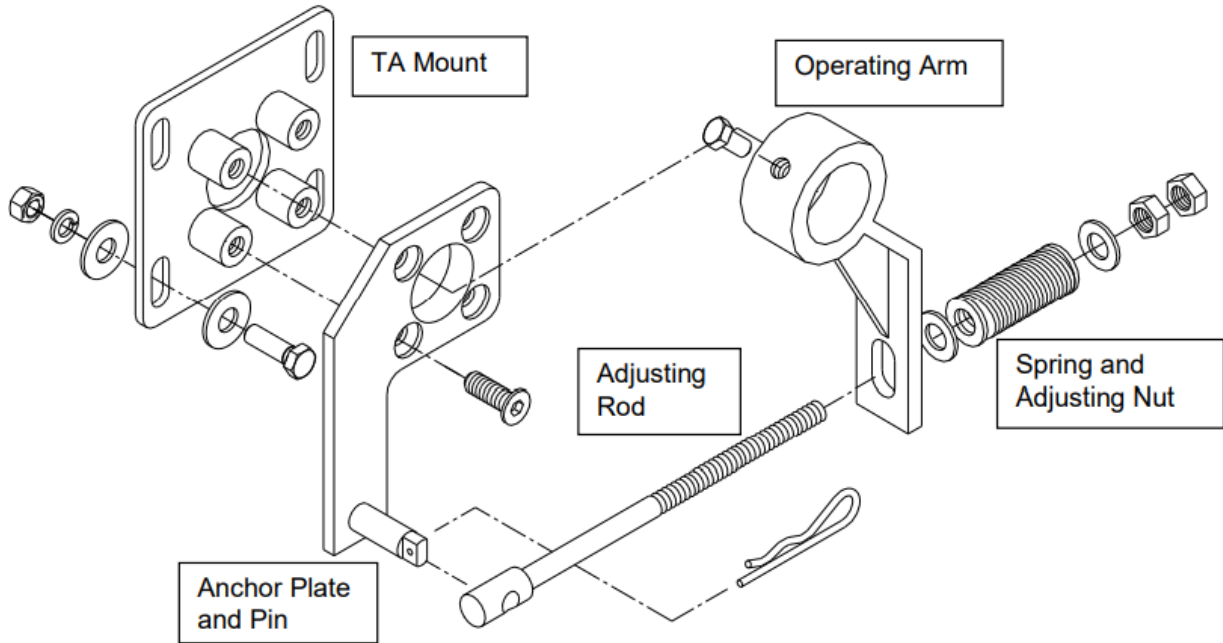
Spring Tensioner Assembly 09010309 with TA Mount (not included)
